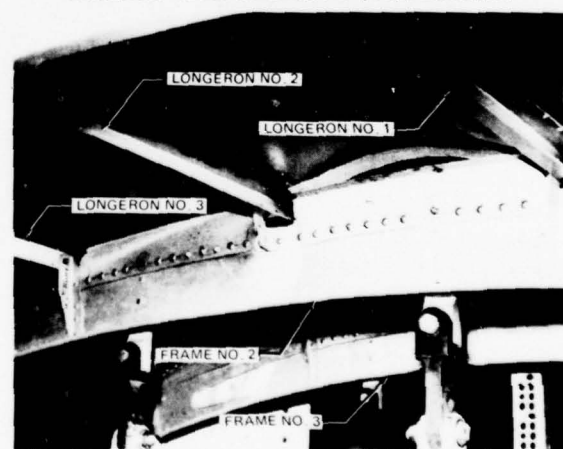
FRAME BENDING TEST, FRAME TEE DISBOND
